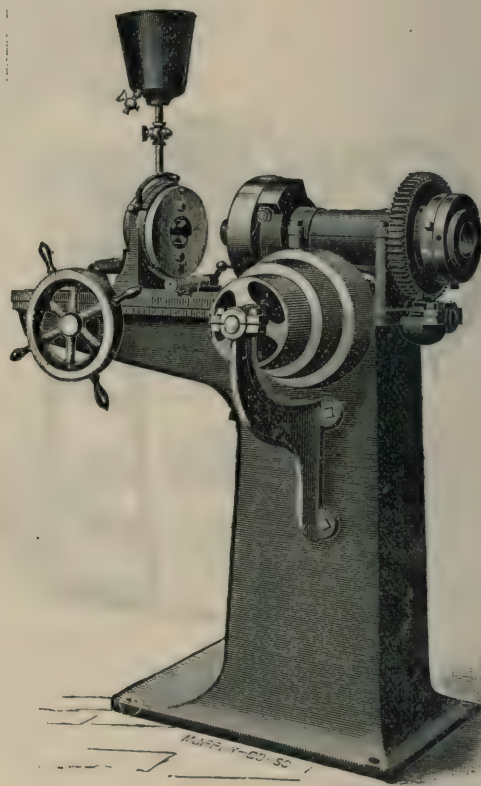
No. 6, Hand Machine, with Right Hand Dies, $\frac{1}{4}$ to 2 in.	145.00
